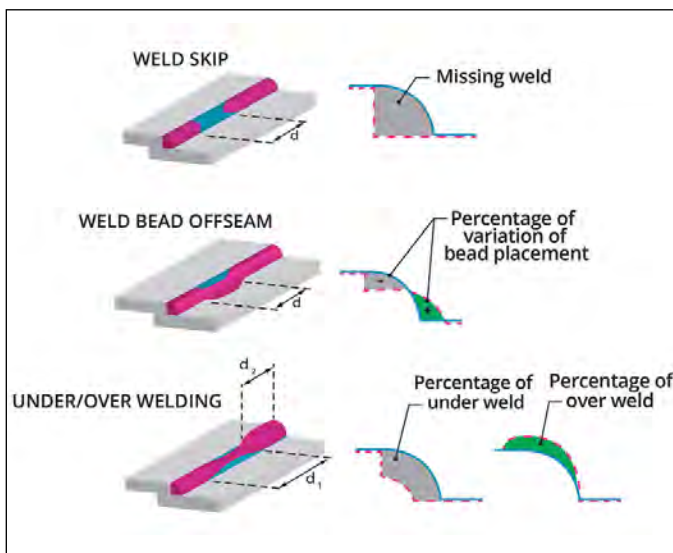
Examples of detectable weld defects using the comparative surface map method.
